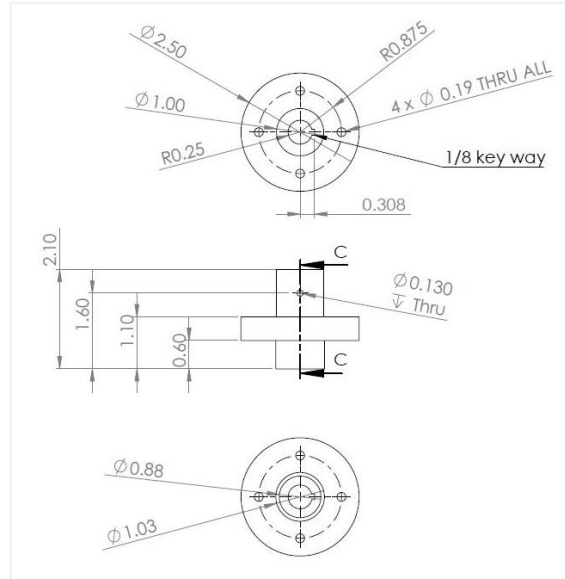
Inner Magnet Coupler Pump Attachment Engineering Drawing
